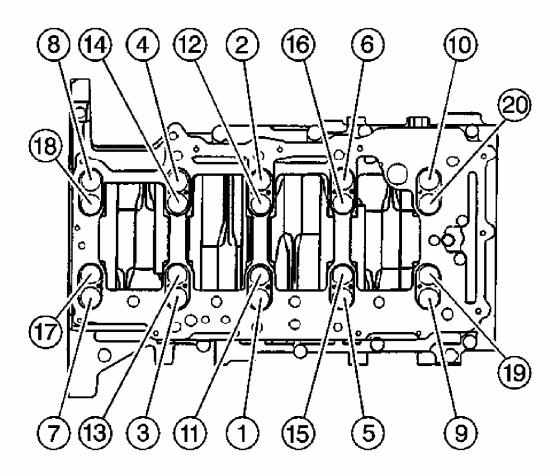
Identifying Lower Crankcase Bolts Tightening Sequence Courtesy of GENERAL MOTORS CORP.
